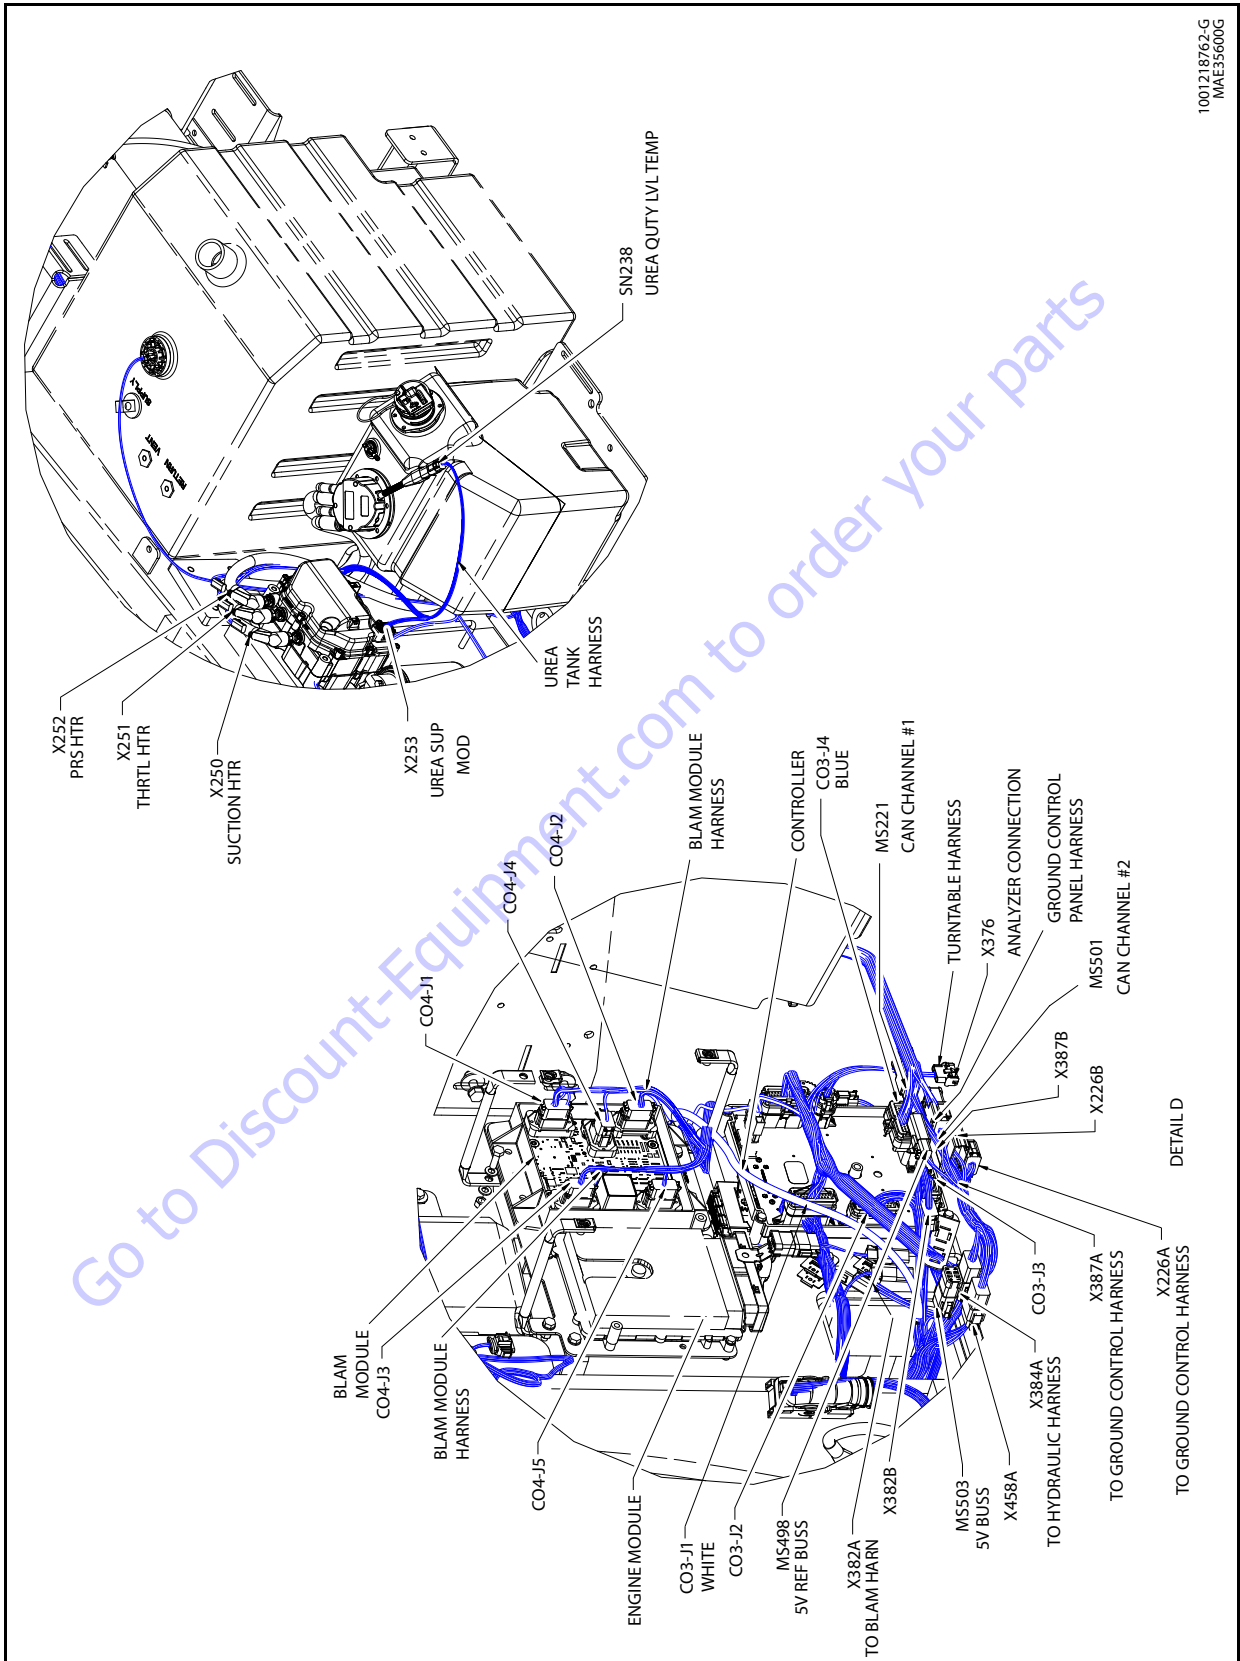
Chassis & Turntable Electrical Installation (HRC) - Sheet 2 of 11
